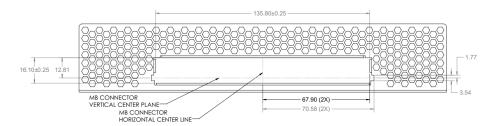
LFF Baseboard Chassis CTF Dimensions (Side View)
